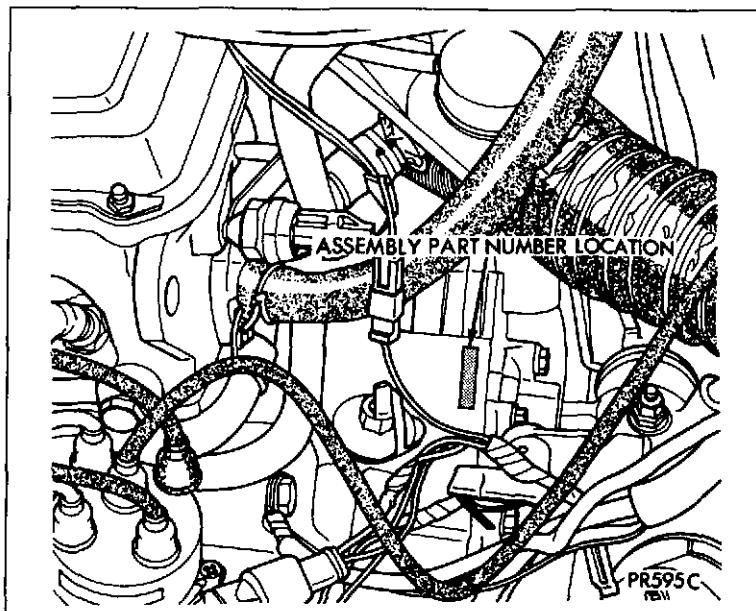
Location of Assembly Part No. on A-413 Transaxle
